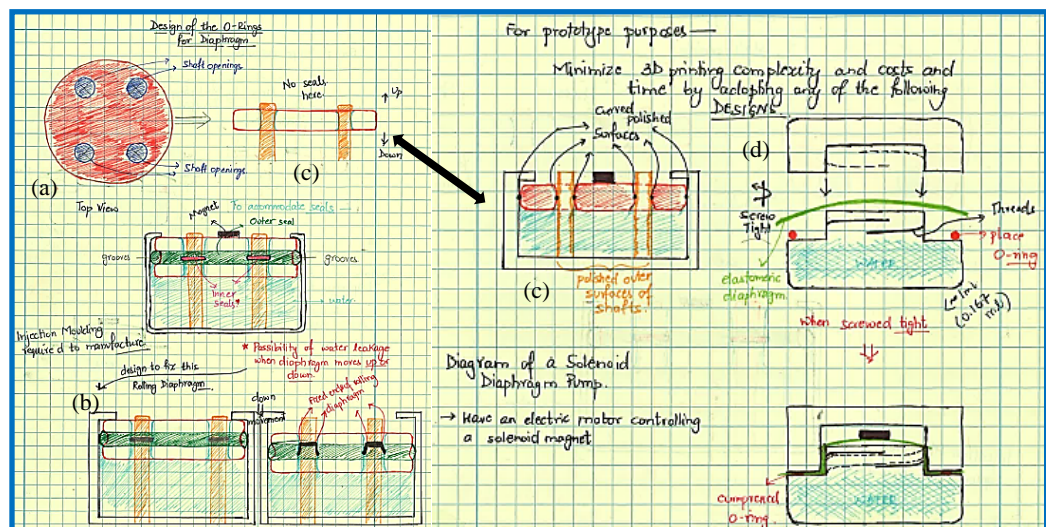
(a) Holes for the pump shafts in a rigid diaphragm (shown in navy blue color); (b) O-Ring incorporated design with O-ring seals around the diaphragm (shown in green) and rolling diaphragm seals around the shafts within the diaphragm holes (shown in red); (c) Similar pump design without O-rings and frictionless surfaces inside the pump for smooth diaphragm movement; (d) A cap-screw design with an elastomeric diaphragm sandwiched between the two parts that evenly stretches out over the pump opening as the cap is tightened. (The magnets are shown in Black)
